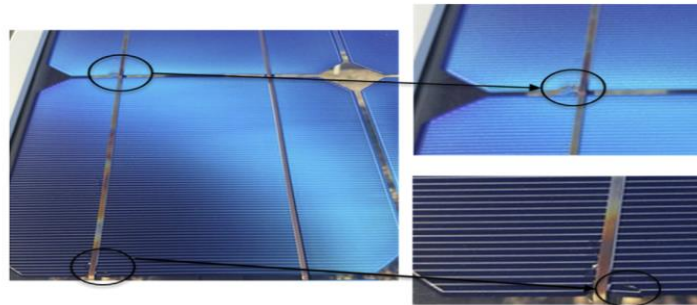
Fracture and cracking defects are clearly visible in photovoltaic module cells [85].
